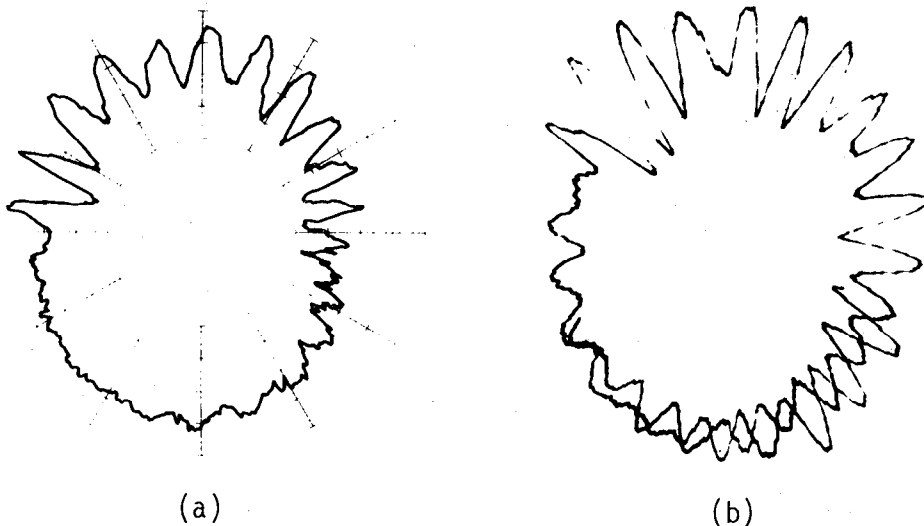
Cylindrical-grinding machine: (a) polar plot showing error motion of the workpiece spindle; (b) polar plot showing workpiece out-of-roundness.
